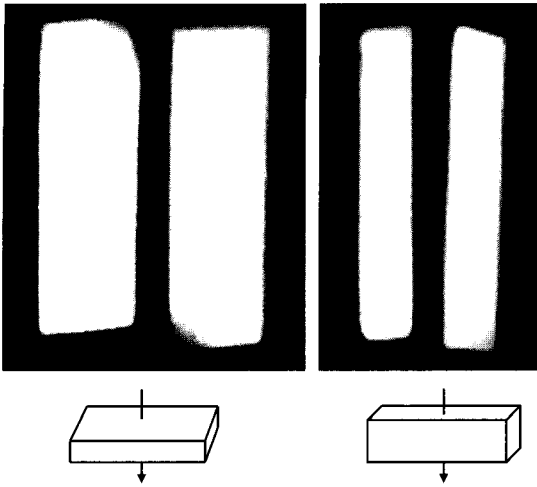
X-ray shows  $\varnothing$  0.025 mm double platinum wire after pressing.(staining technique)
